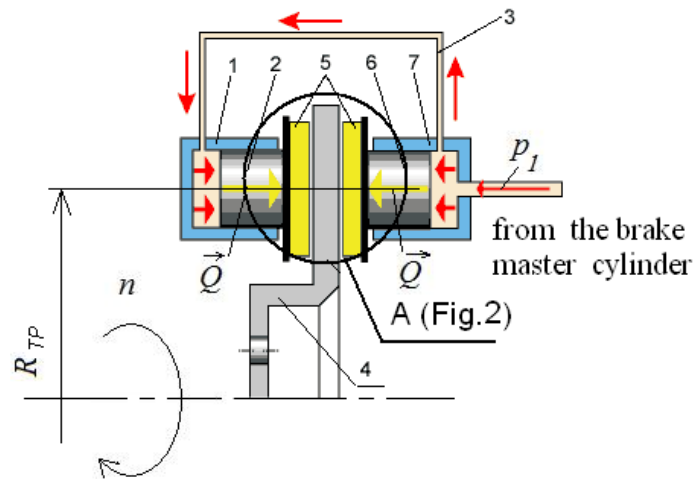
Scheme for visnosny znosu disk galma: 1 - the outer working cylinder (left) brake; 2 - the piston; 3 - connecting tube; 4 - a brake disk of a forward (left) wheel; 5 - brake pads with friction linings; 6 - the piston; 7 - the inner working cylinder of the front (left) brake
